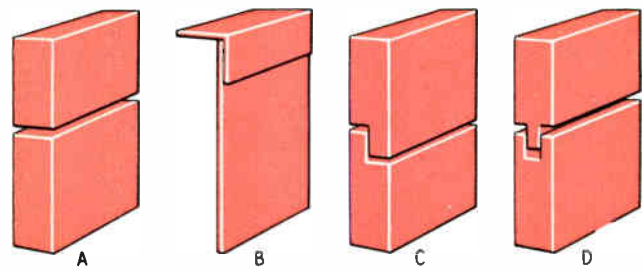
Various joint designs suitable for ultrasonic welding techniques. Designs B, C, and D are preferred since friction is maximized by using sliding surfaces perpendicular to the butt surface
